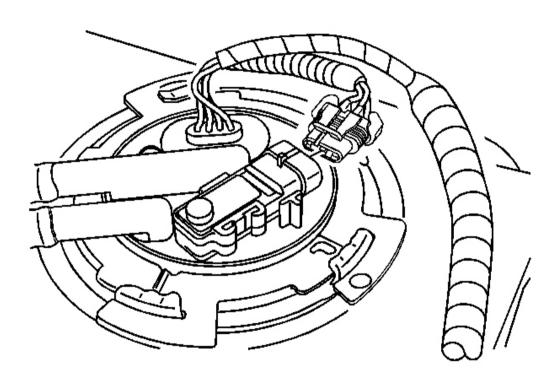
View Of Fuel Tank Pressure Sensor Courtesy of GENERAL MOTORS CORP.
